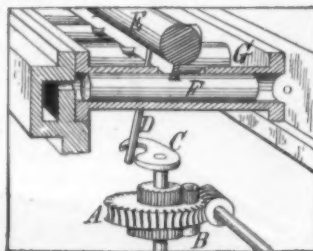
DETAILS OF SLIDING CYLINDER PUMP.
